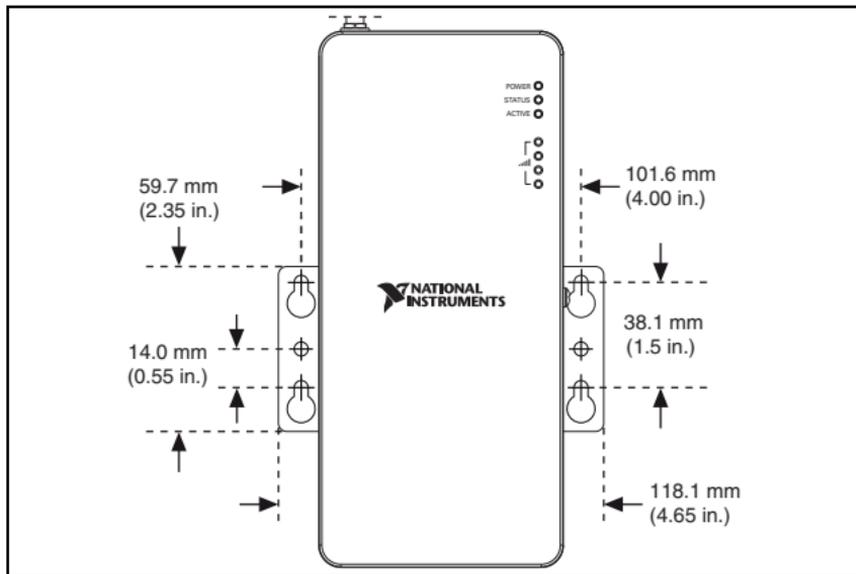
NI 9903 Panel Mount Accessory Dimensions
